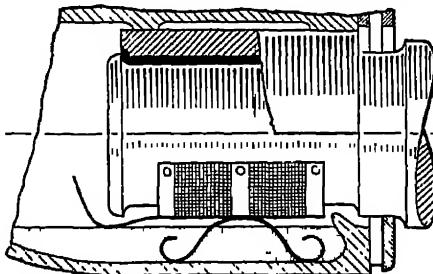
DRAWING OF LOCOMOTIVE WAGON AXLE BEARING
